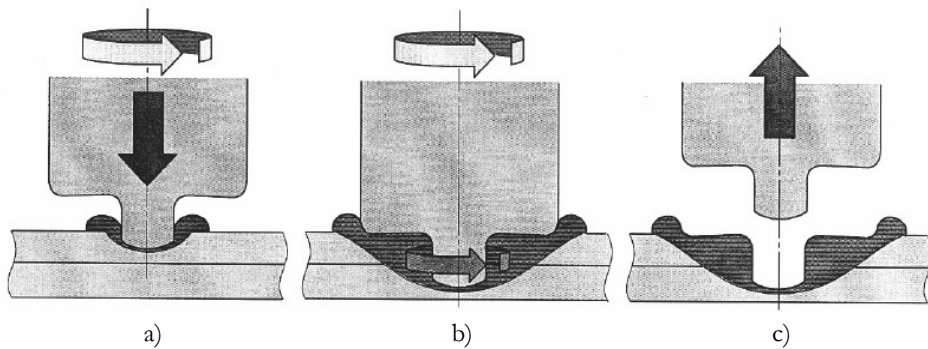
Pure FSSW principles with probe tool. a) Plunging. b) Holding. c) Withdrawing. [20].
